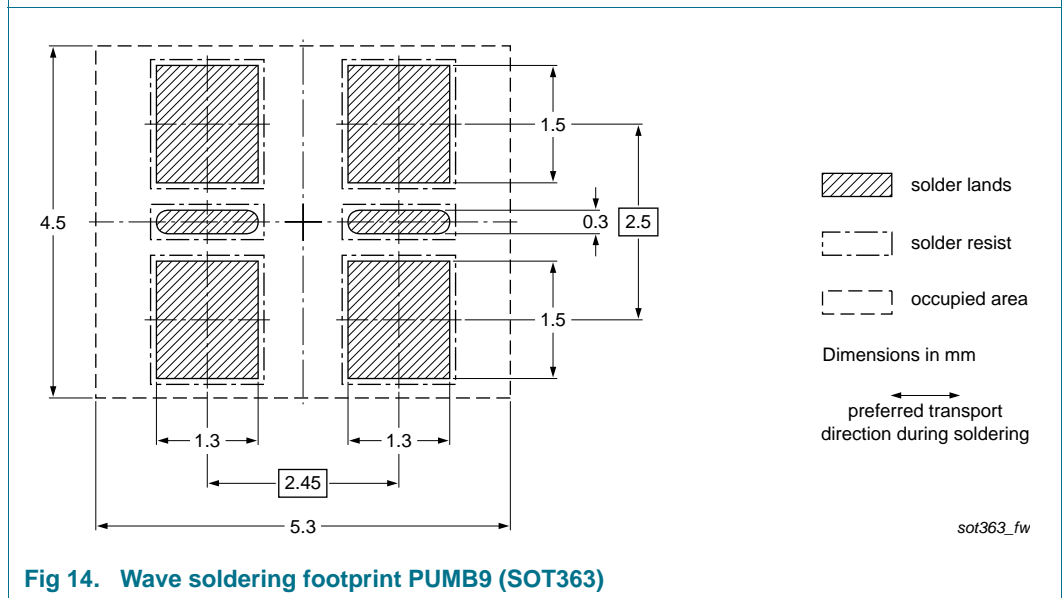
Wave soldering footprint PUMB9 (SOT363)
